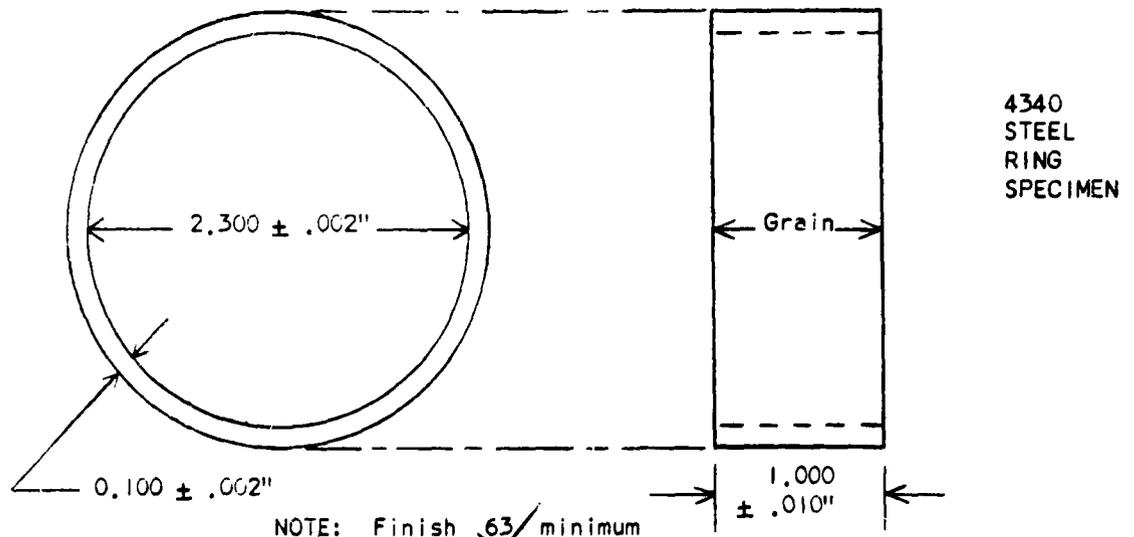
DETAILED DRAWING OF DOUGLAS RING TEST SPECIMEN
